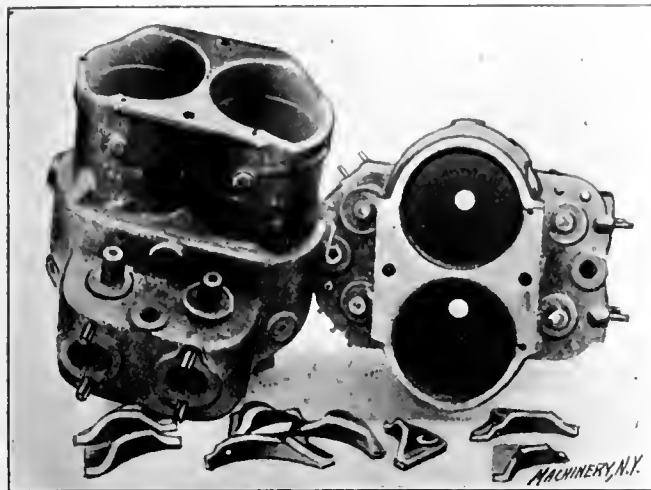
A Badly-broken Casting, illustrating the Possibilities of Autogenous Welding.
